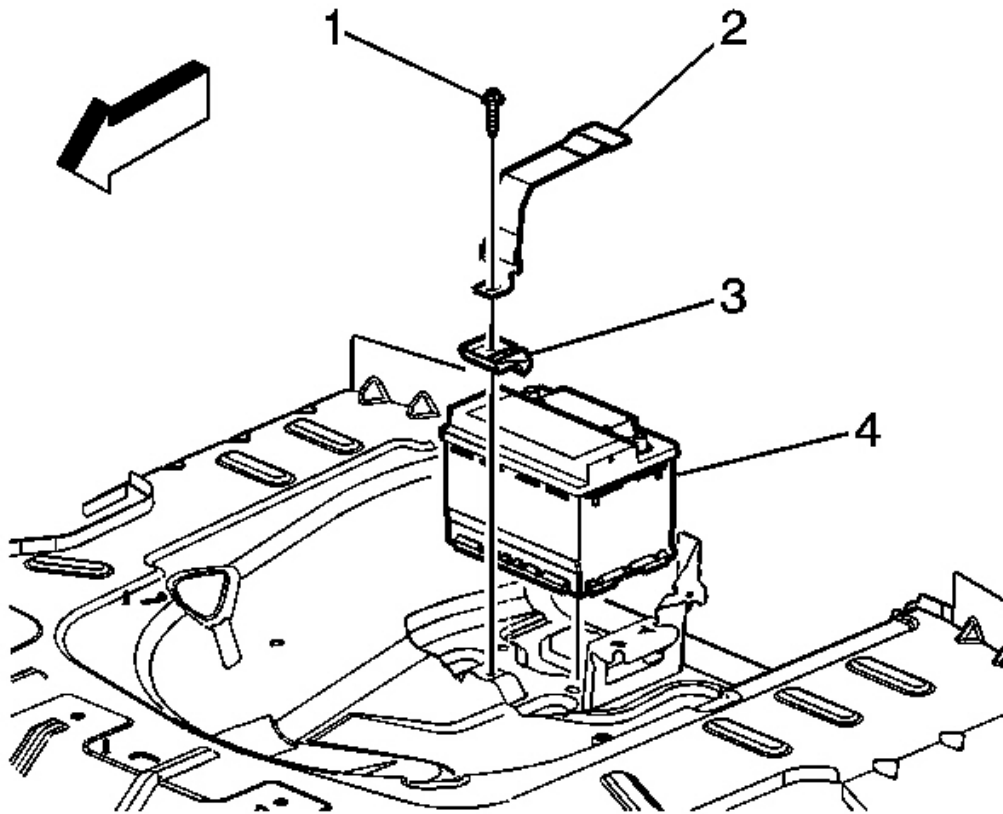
Identifying Battery, Retainer, Bolt & Strap
